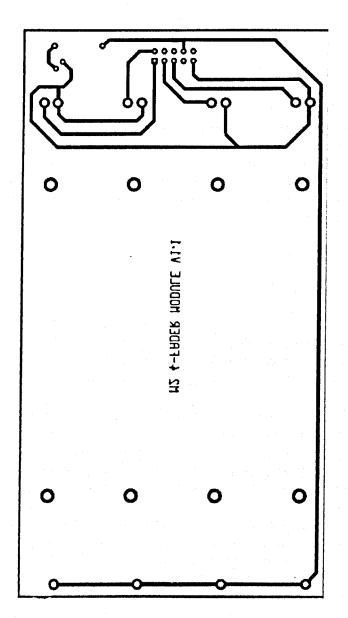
Printed circuit board design for the M2 4-Fader Module v1.1, as viewed from component side (actual size). Dimensions: 80 x 150 mm.
